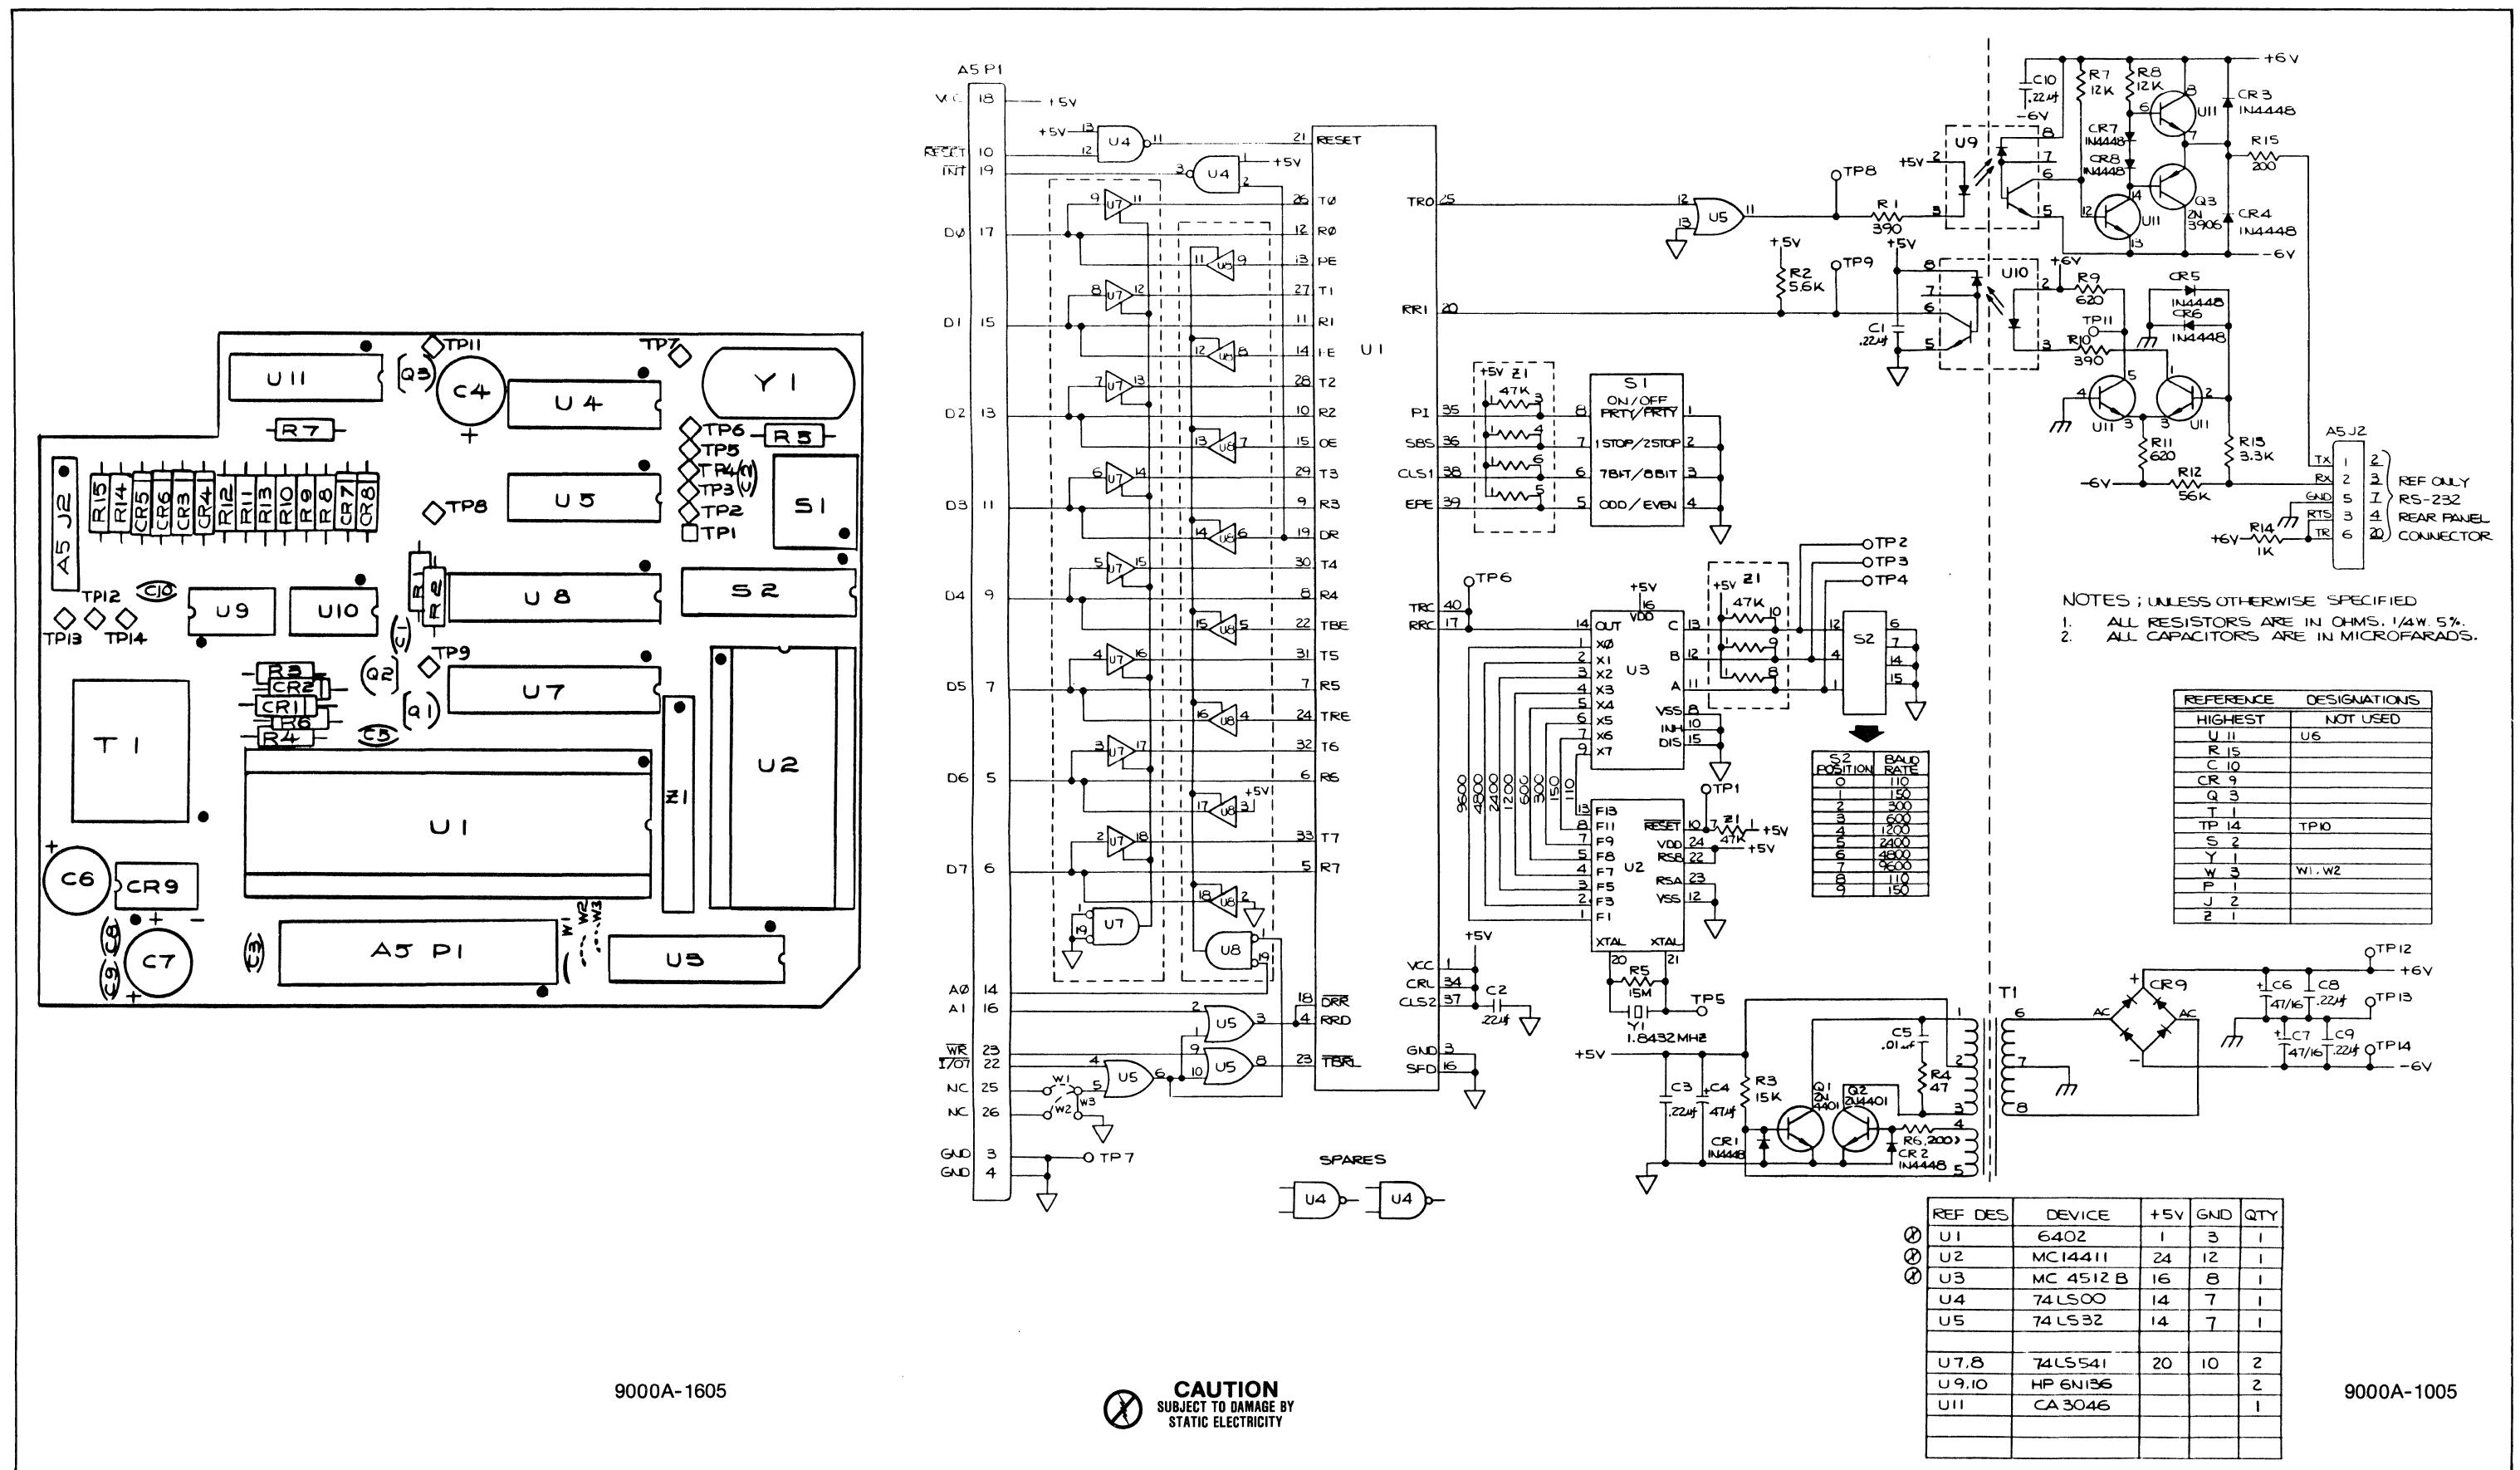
Option-001, RS-232 Interface PCB Assembly
